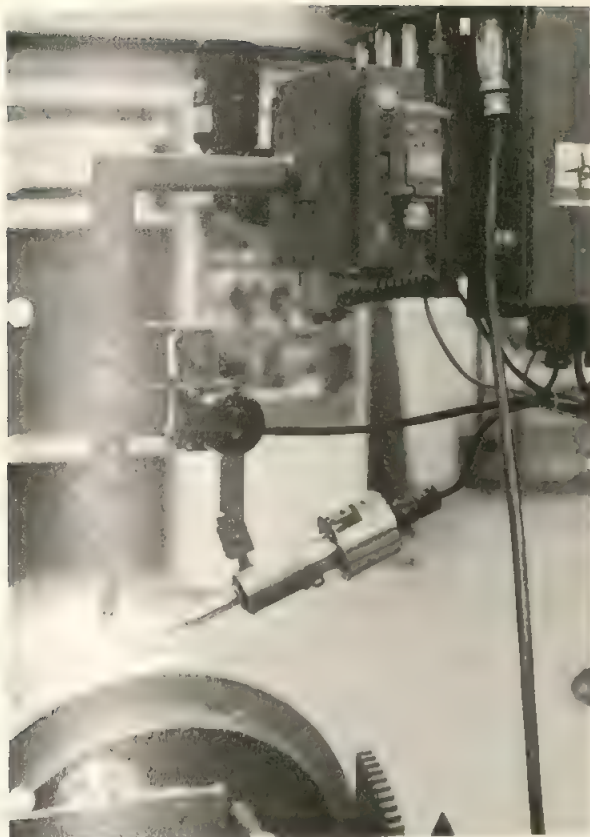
Electromechanical tracker on pipe weld.
